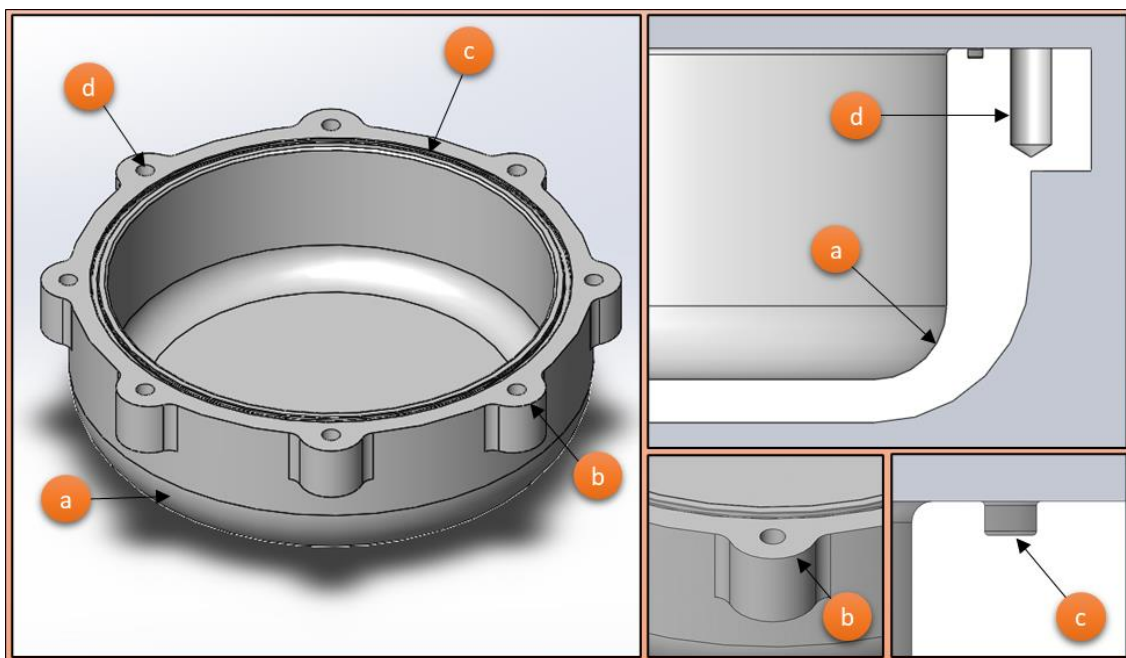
WCH box final design; a: Curved corner, b: 8×flanges, c: O-ring groove, d: Lid connection (8×M8 tapped hole)
